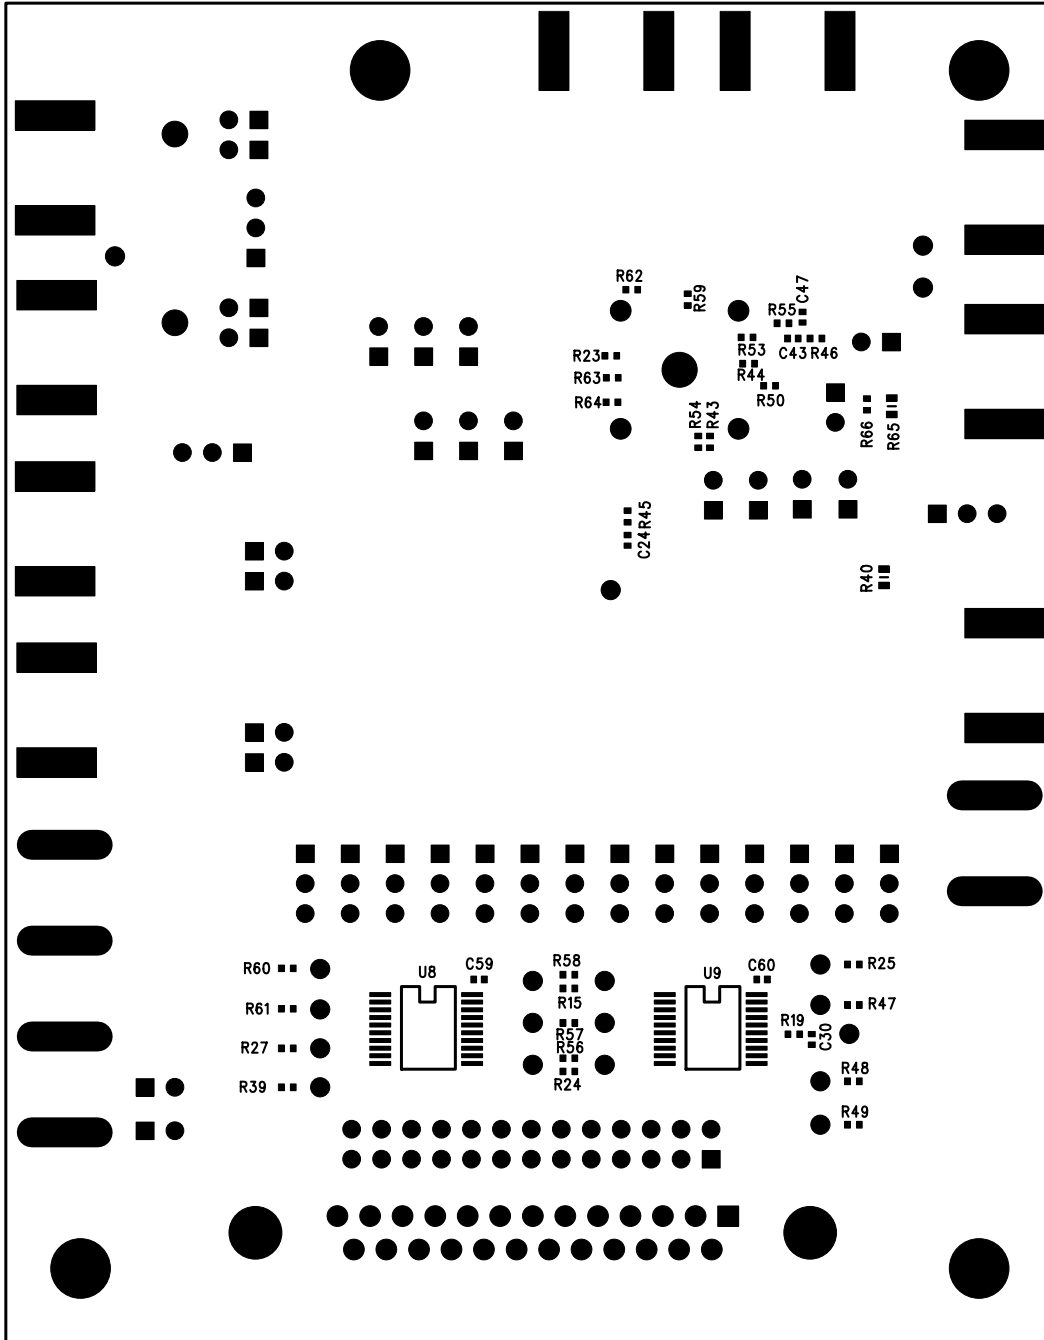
MAX2838 EV Kit PCB Layout—Bottom Silkscreen
